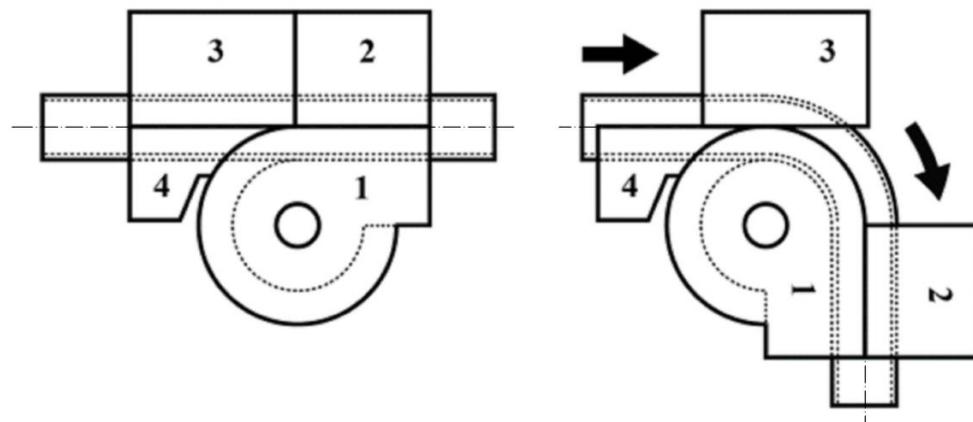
Steps and main components in the rotary tube bending process: 1) Bending die; 2) Clamping die; 3) Pressure die; 4) Wiper die
